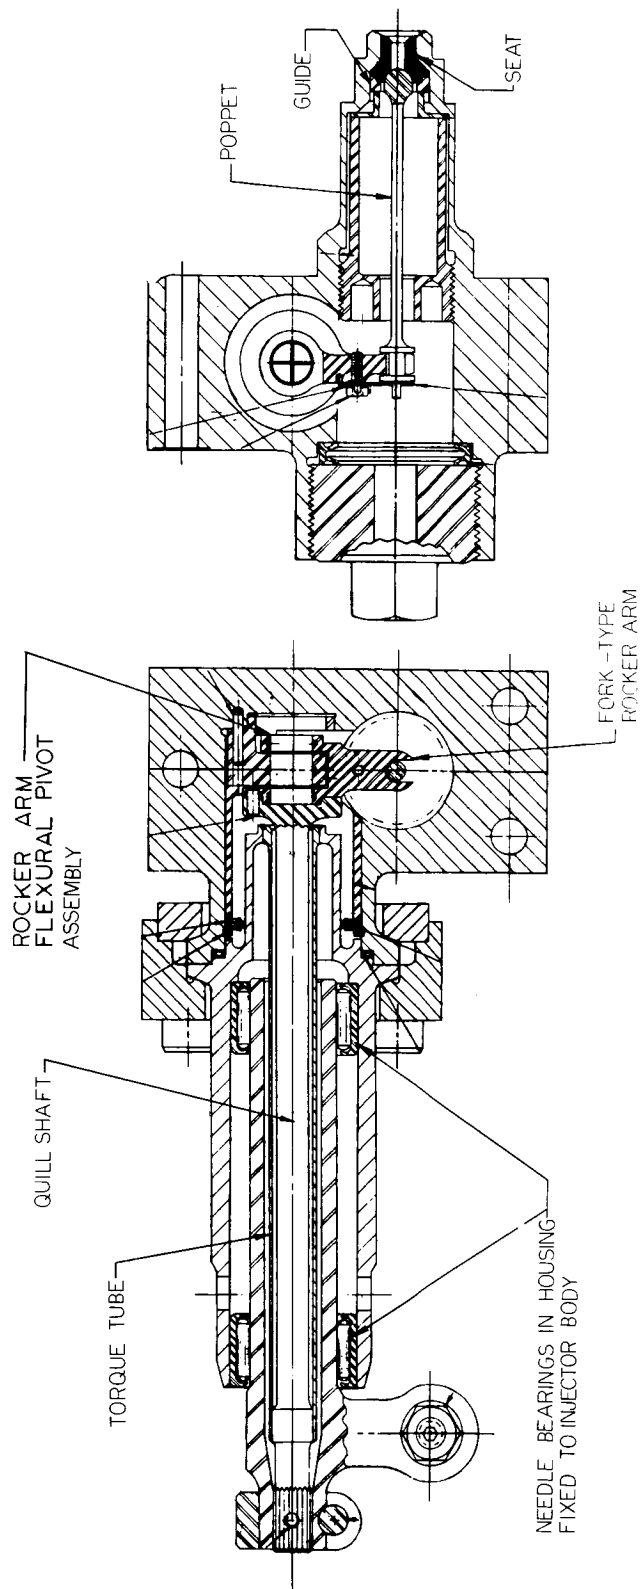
Section Views of Initial Oxygen Injector Assembly
